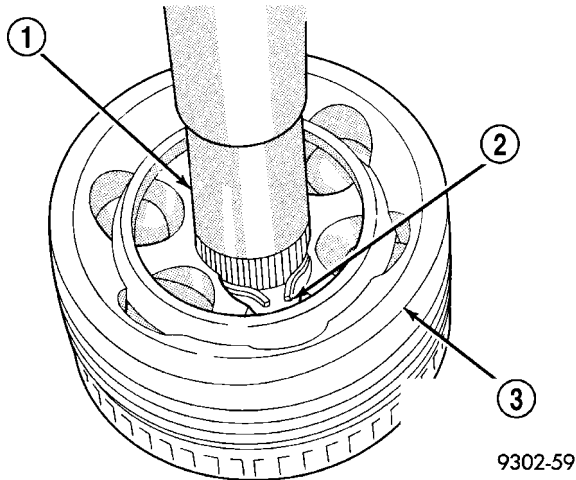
Outer C/V Joint Installed On Interconnecting Shaft
